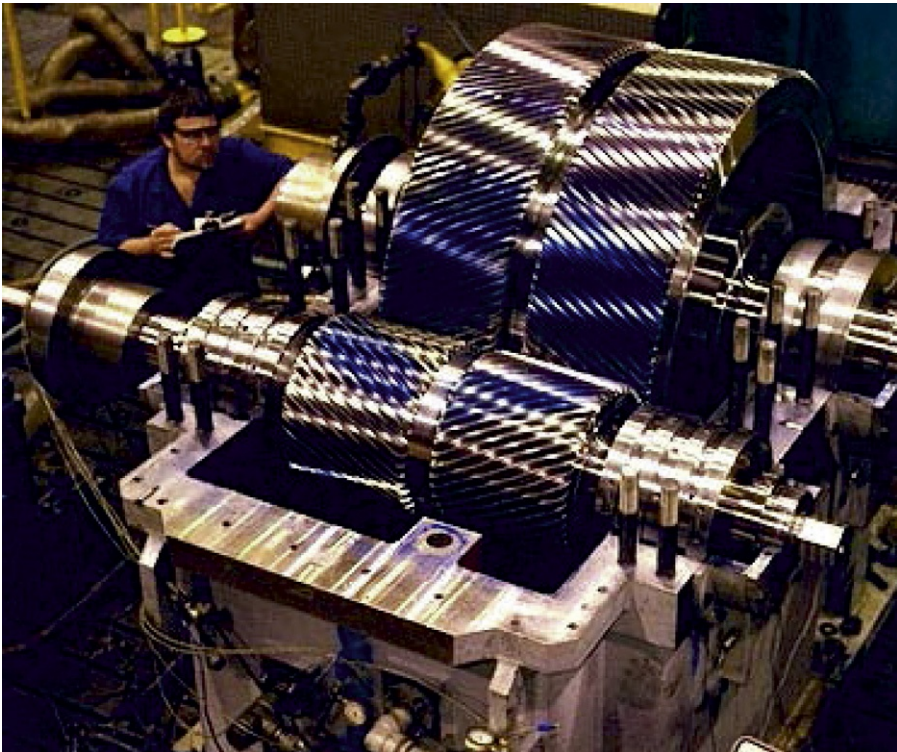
A double helical 54,000-HP (40 MW) gearbox (courtesy Lufkin Industries, Inc.).
